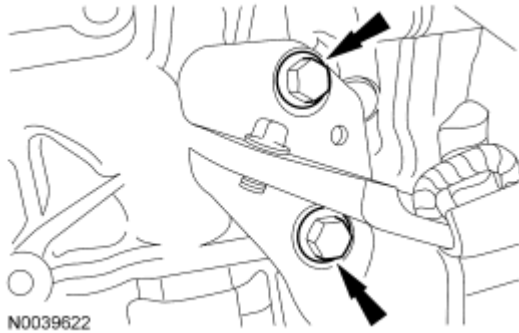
Locating RH Halfshaft Carrier Bearing Bracket Bolts
